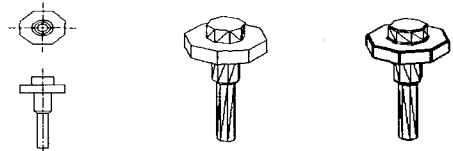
Result of the corner/fillet correction module for parts with sharp edge
